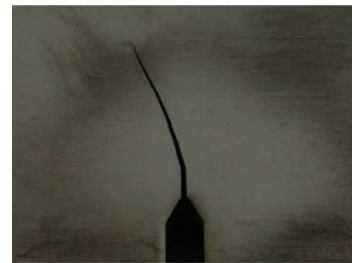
Macroscopic view of fatigue crack growth path of SENB specimen
